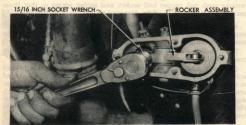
Loosening Rocker Adjusting Screw Lock Nut
